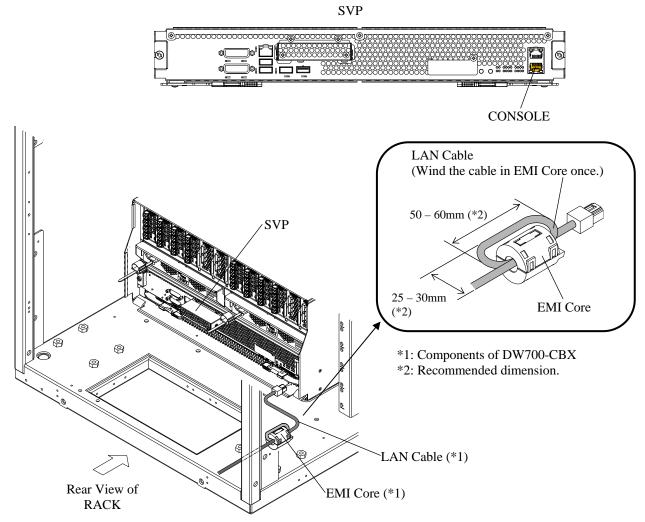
Connection of LAN Cable (SVP)
